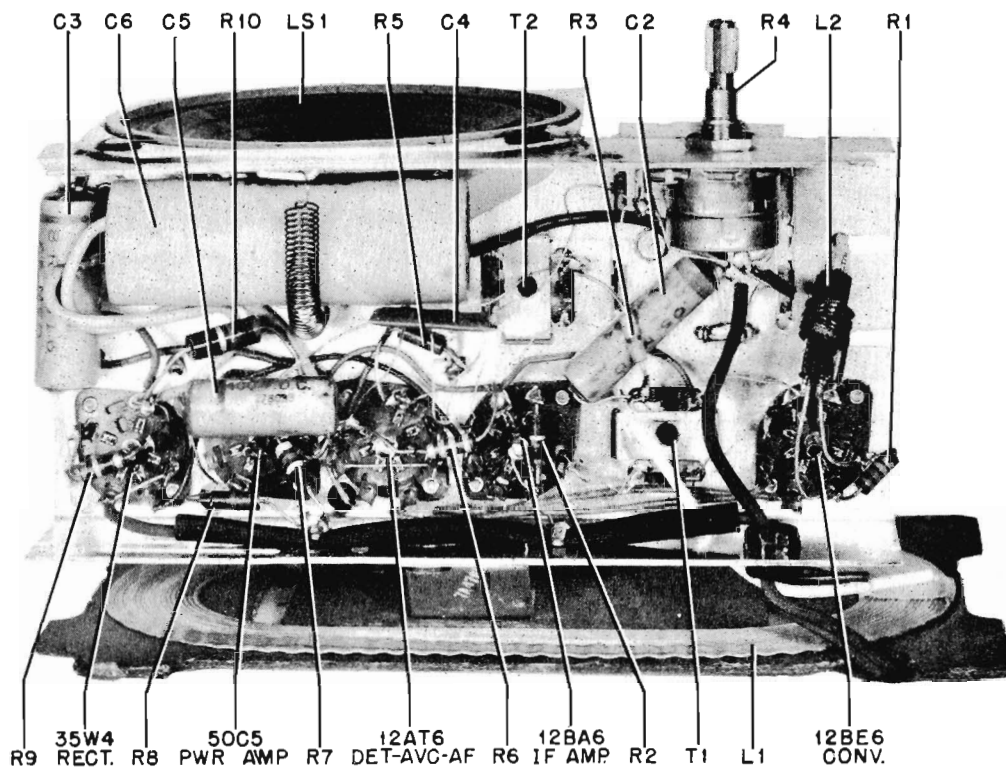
BOTTOM VIEW OF CHASSIS USING MULTIPLE CERAMIC CAPACITOR PLATE
